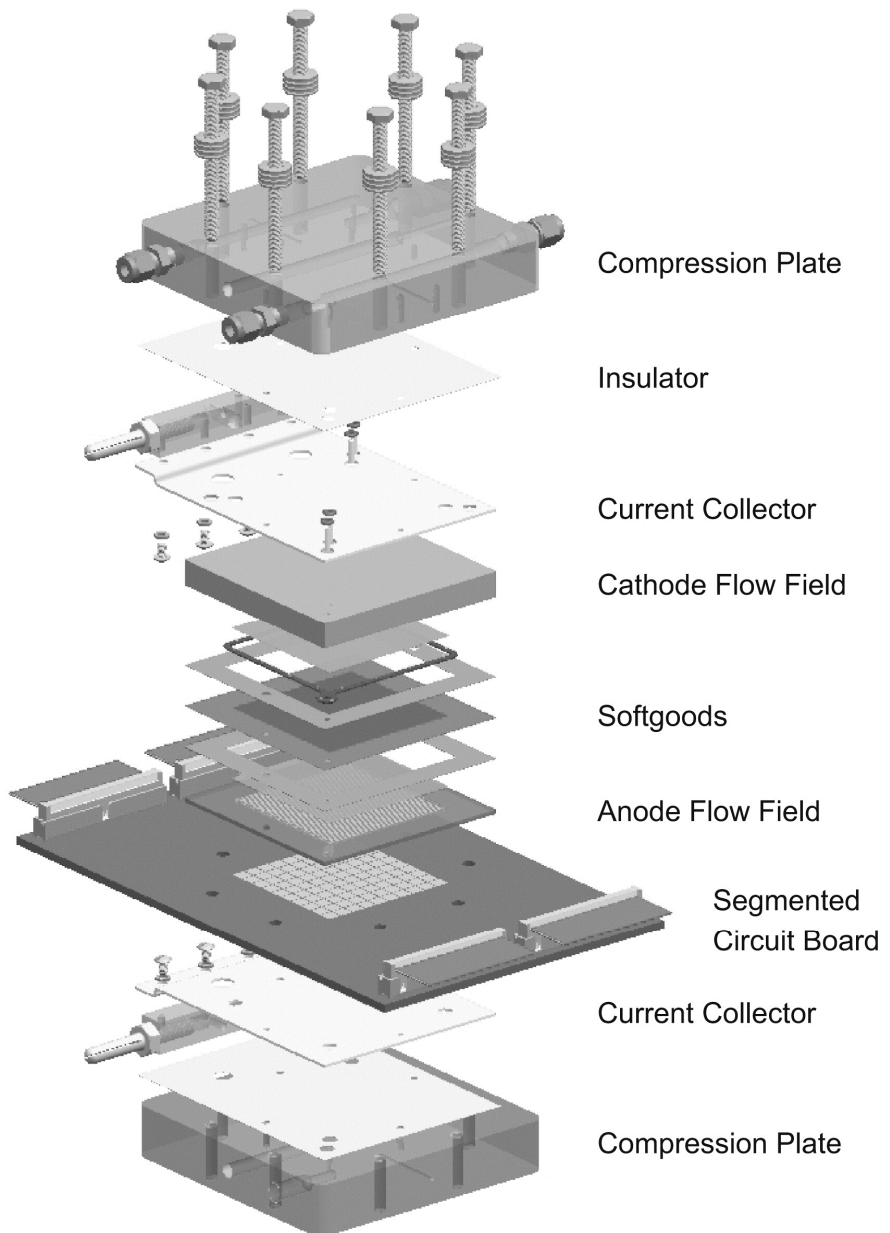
Exploded view of a segmented fuel cell assembly using the PCB approach. From Ref. [25] with permission.
